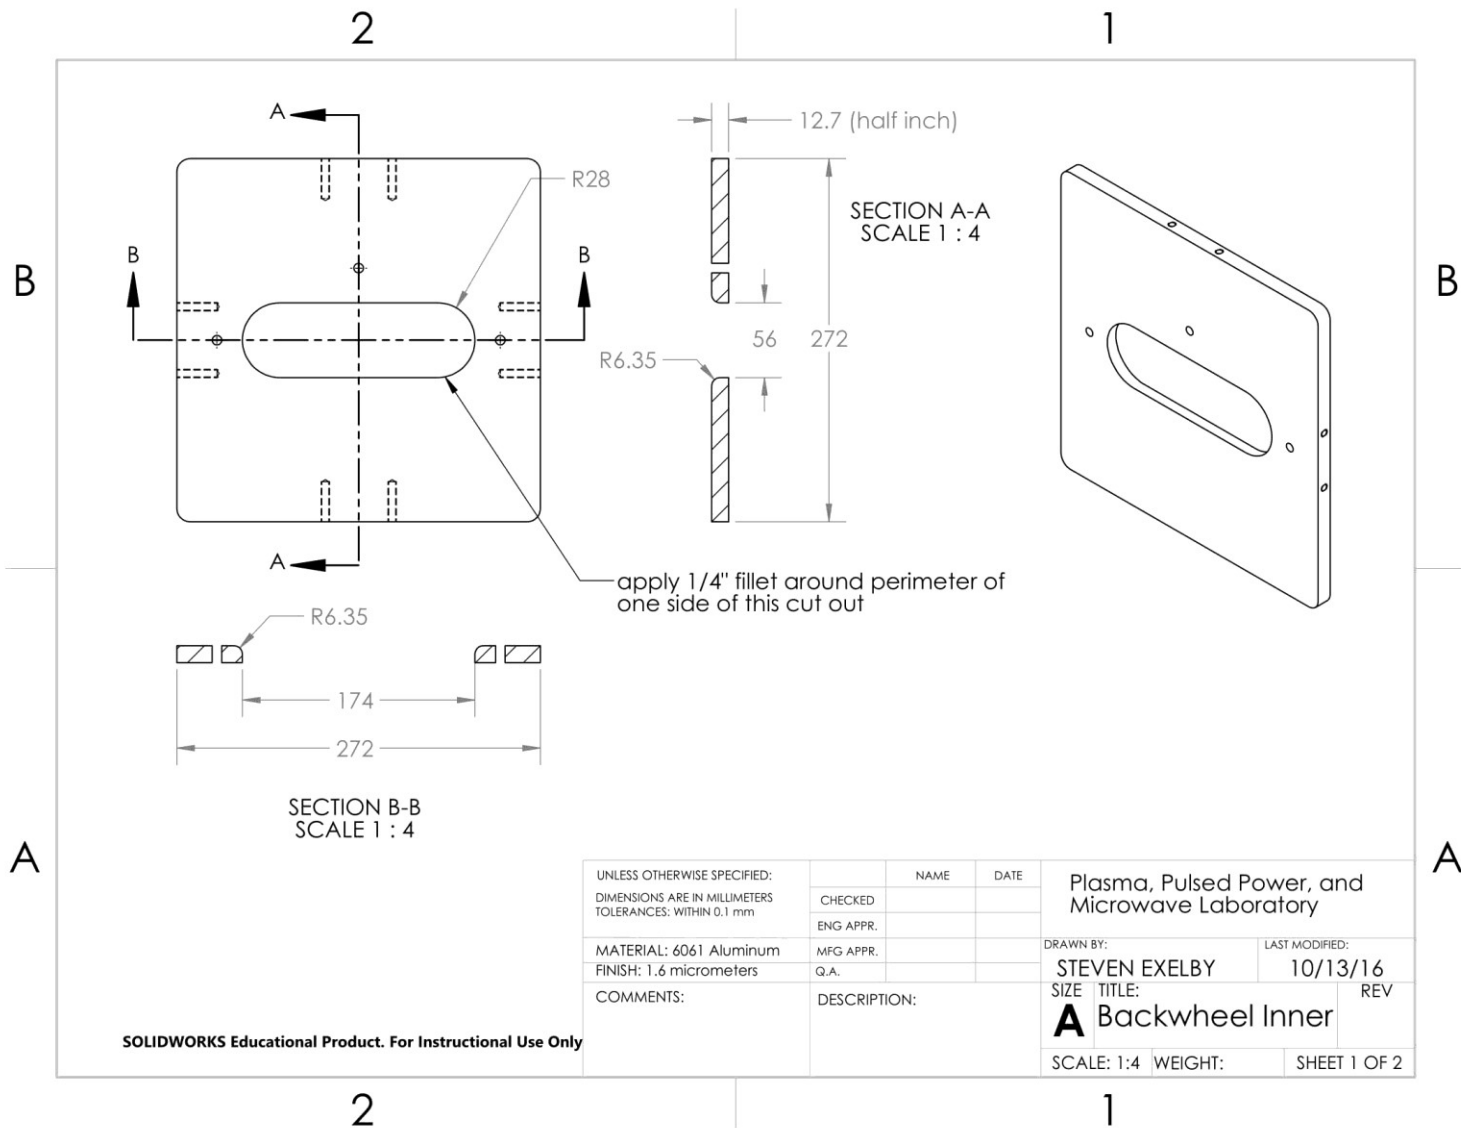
Center piece of the back wheel that locks the inner housing into position, page 1.
